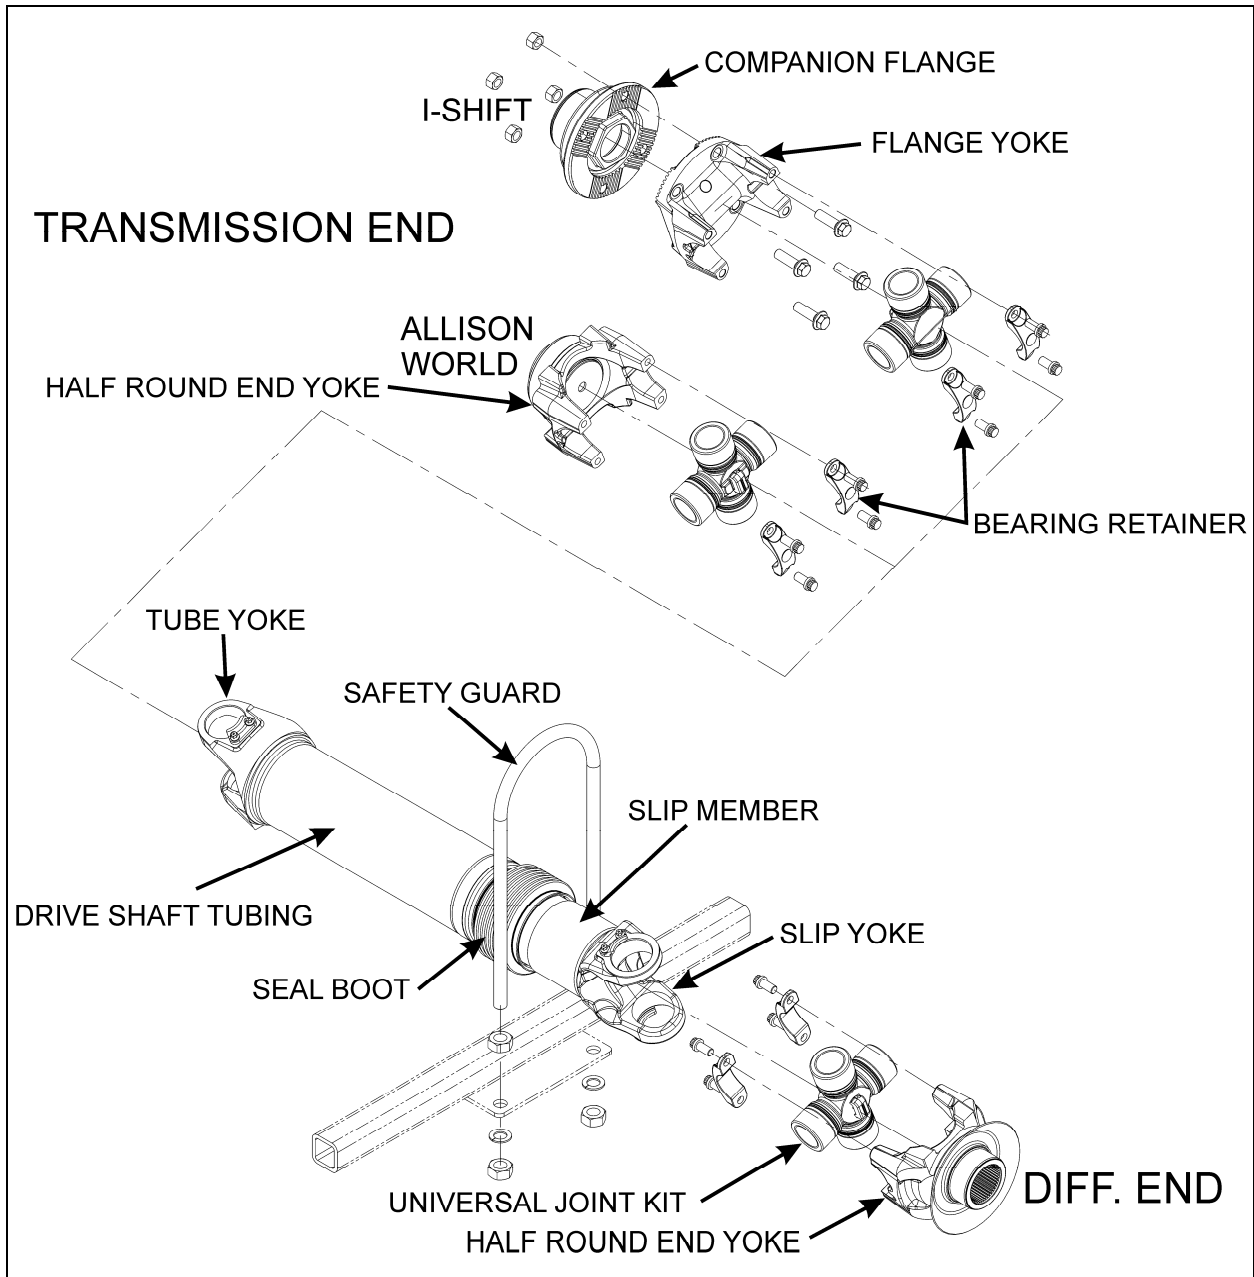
PROPELLER SHAFT ASSEMBLY
